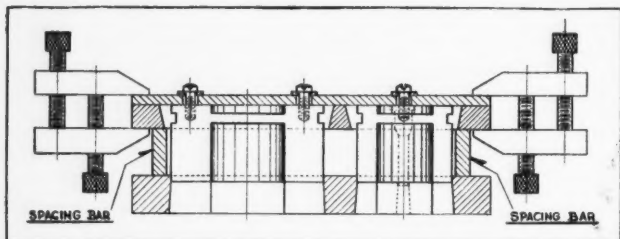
Punch parts assembled, properly spaced and fastened. The two large punches are located from the die.
